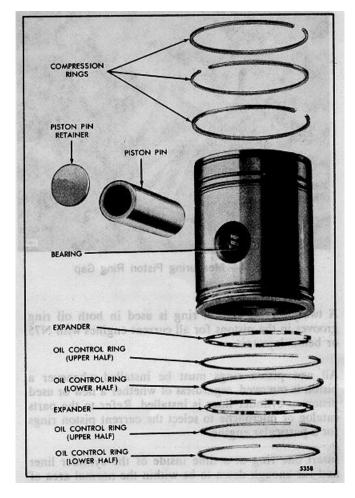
Piston Ring Location (Non-Turbocharged Engine)
